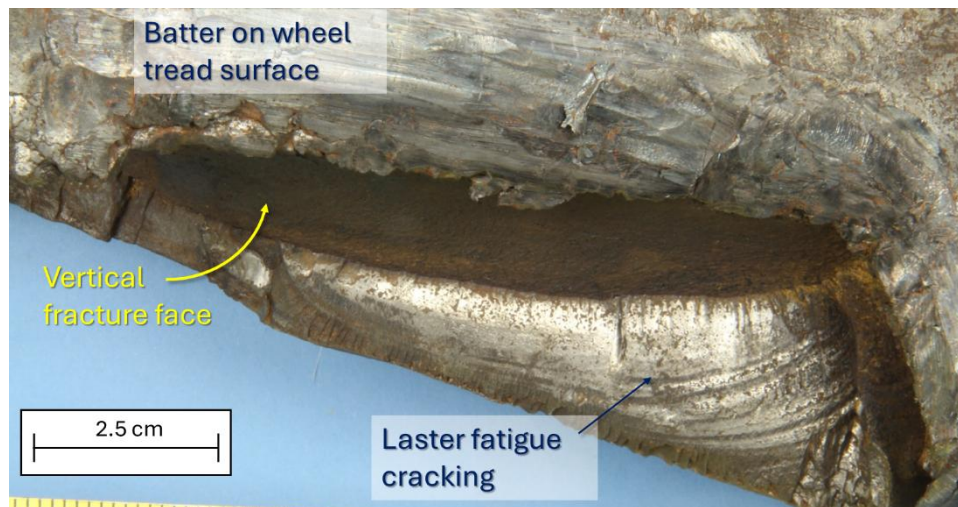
Surface batter on the wheel tread surface, the vertical fracture face, and the inner perpendicular progressive fracture
